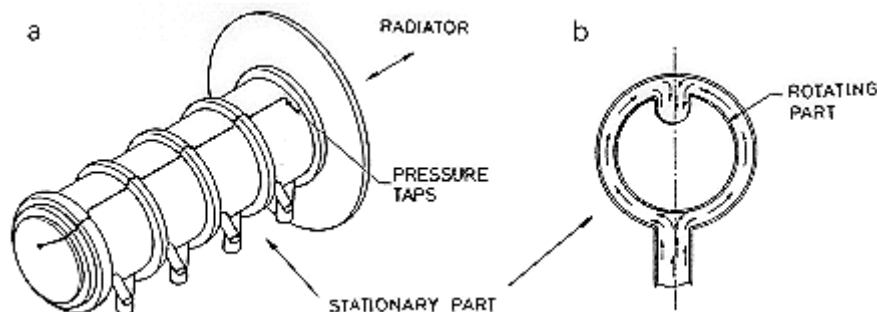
Rotatable fluid transfer coupling. a) General view showing the liquid and vapour radial ports. b) Channel geometry. From Heizer, Goo, Rhodes, Thoreson & Parish (1986) [83].
